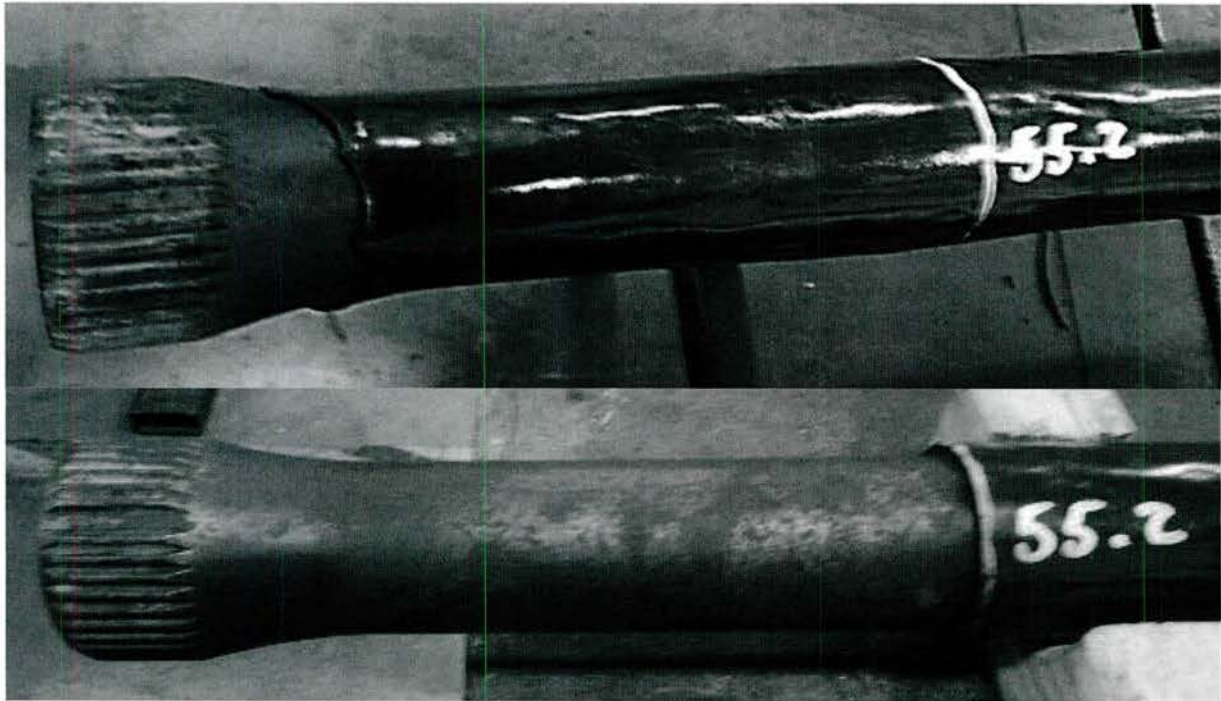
Torsion Bar 55-2 Scrapped for Coating Disbonding. Top View Shows Coating Disbonding, Bottom View Shows Torsion Bar Surface after Coating Removal
